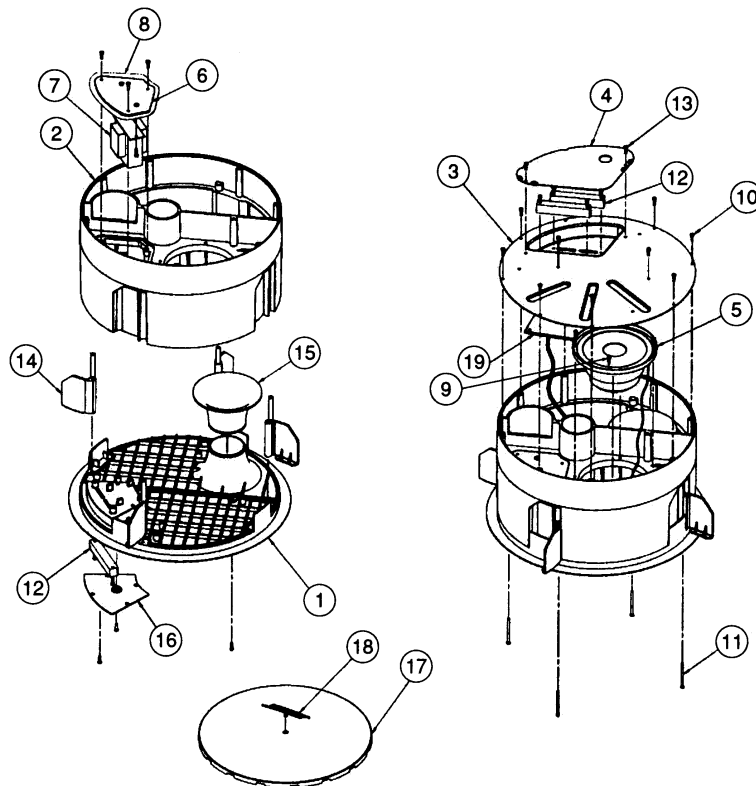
FreeSpace Series II Acoustimass Loudspeaker Exploded View
